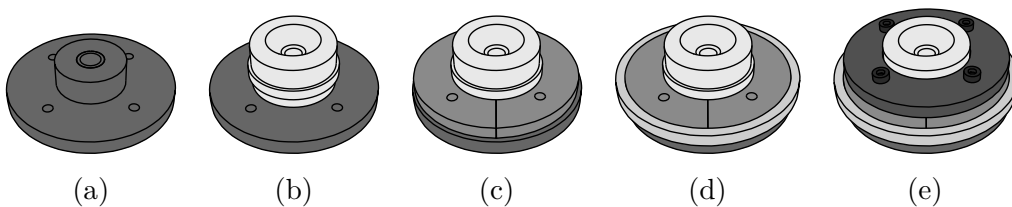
Stages of assembly of the clamping system: (a) base plate, (b) disc spring EIA, (c) jaw plates, (d) compression ring, (e) locking plate and bolts
